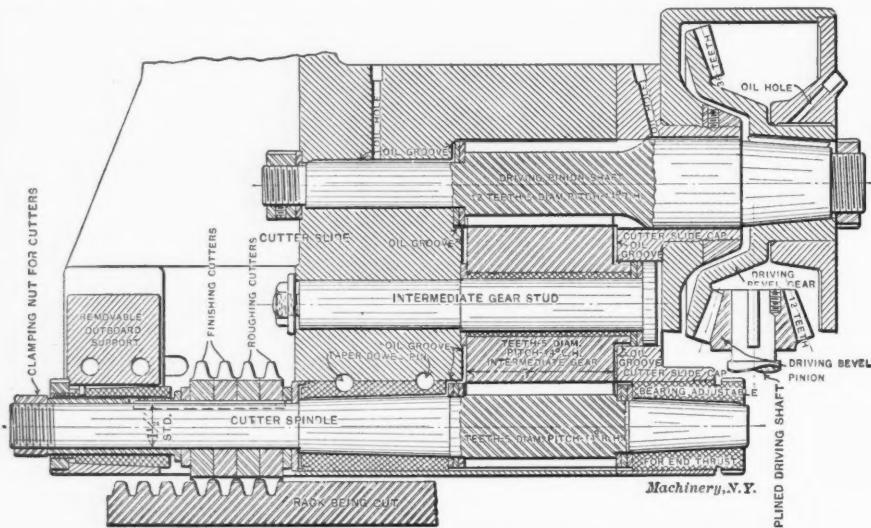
Vertical Section through Cutter Spindle and Driving Gears
